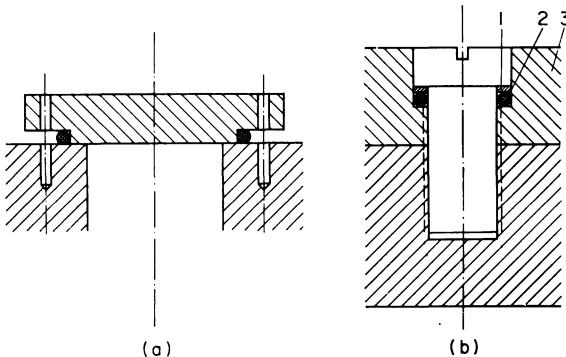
Step seals with O-rings: (a) single step; (b) double step; (1) washer; (2) O-ring; (3) flange
